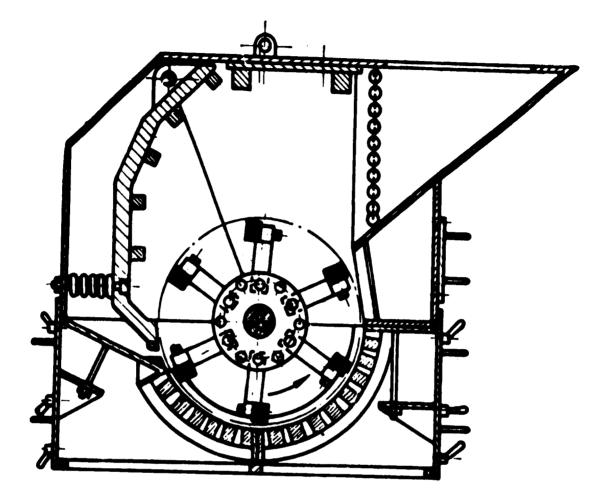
B CROSS SECTION OF HAMMER MILL. (FUCHS),
